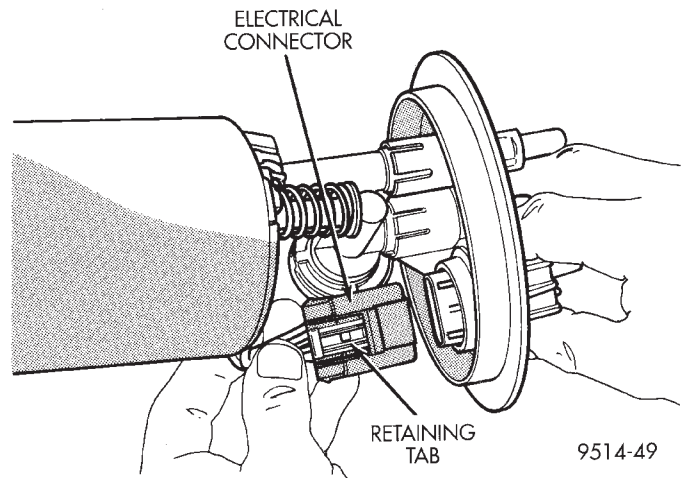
Fuel Pump/Level Sensor Electrical Connector
